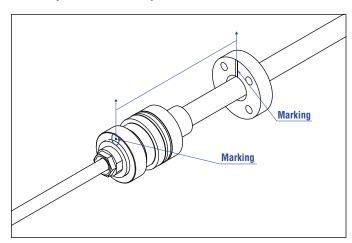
Magnet alignment of ring magnet for RDV EtherNet/IP<sup>TM</sup> with internal linearization using the example of a »S« flange
